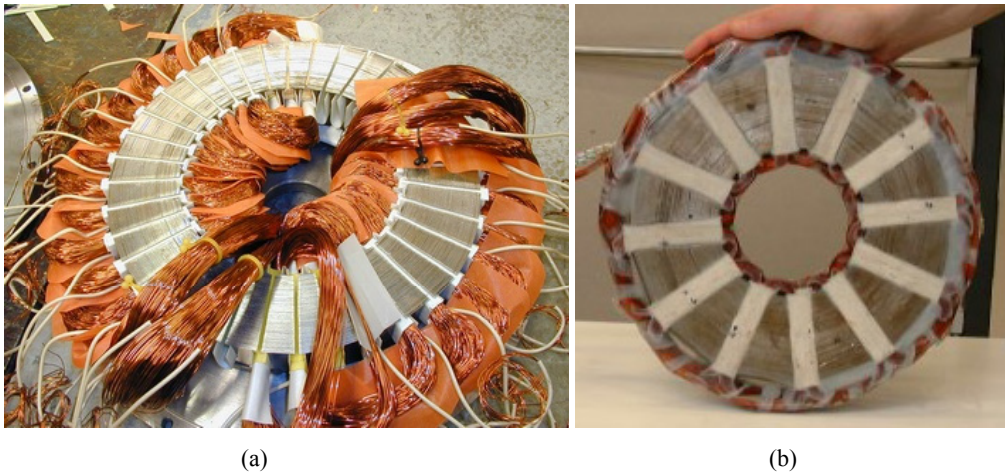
(a) Limited space on the inner radius of the axial-flux machine ($Q_s = 36$, $p = 6$, $q = 1$) while winding the axial-flux machine stator. A conventional two-layer lap winding is employed. (b) Concentrated stator winding enabling values for k_D lower than 0.6.
